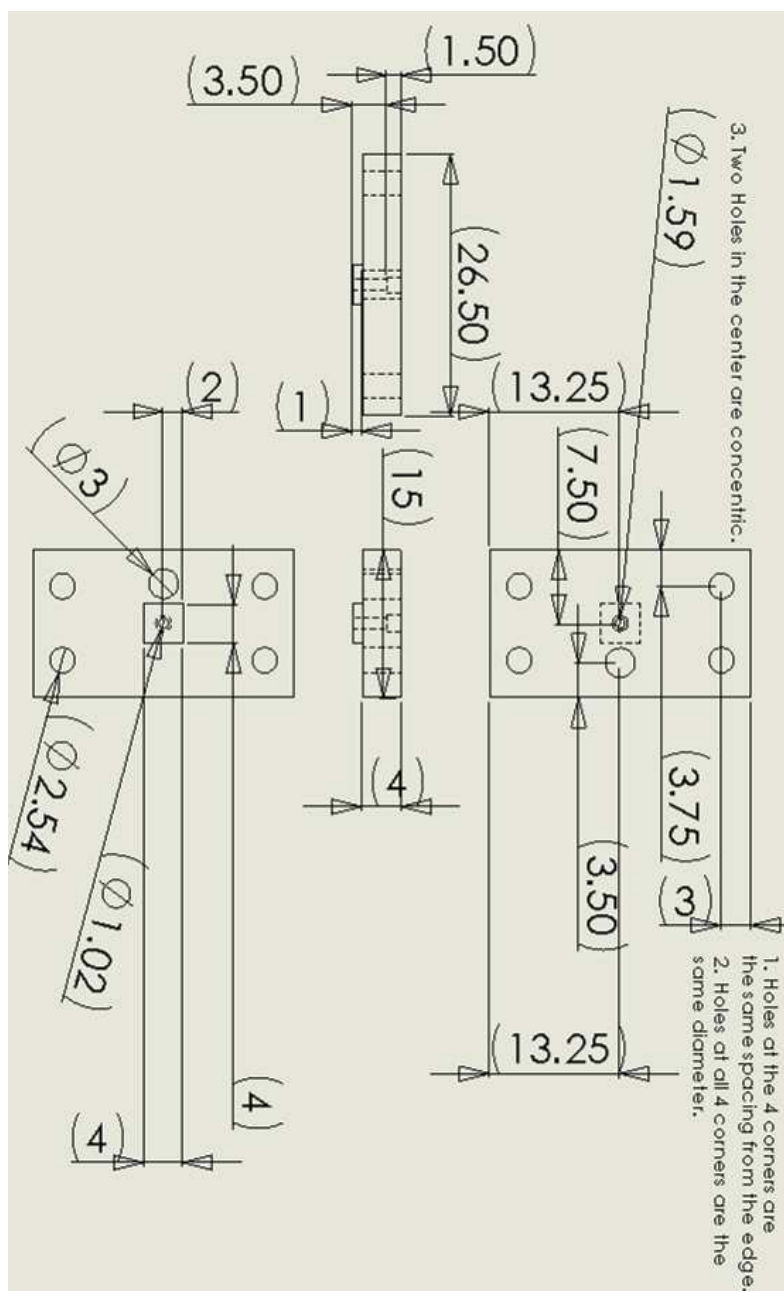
This is a drawing with dimensions of the bottom manifold used for packaging the in-plane cantilevers for liquid operation. All units are in millimeters. The dimensions given are for gluing the die into the manifold. This manifold is attached to a DIL packaged using Epoxy and epoxy is also used to attach a piece of hard tubing to the outlet hole.
